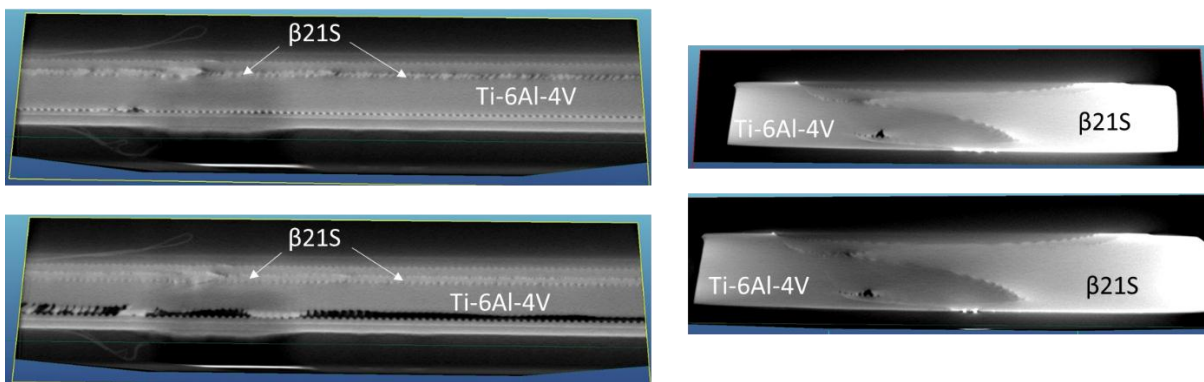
Weld 3 micro CT scans. X-Z (retreating side facing) views on the left, Y-Z (weld travel direction facing) views on the right.
